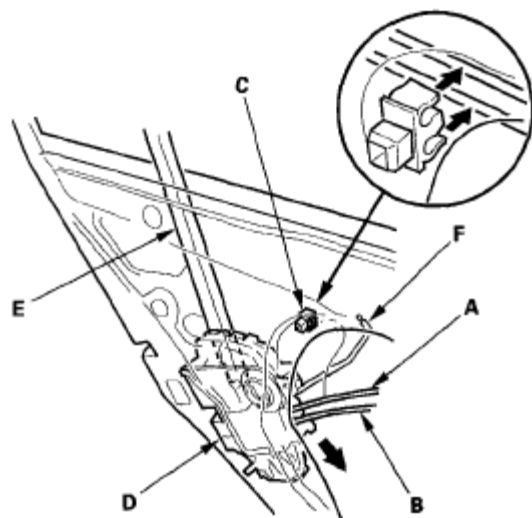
Detaching Latch Cable And Inner Handle Cable From Holder
